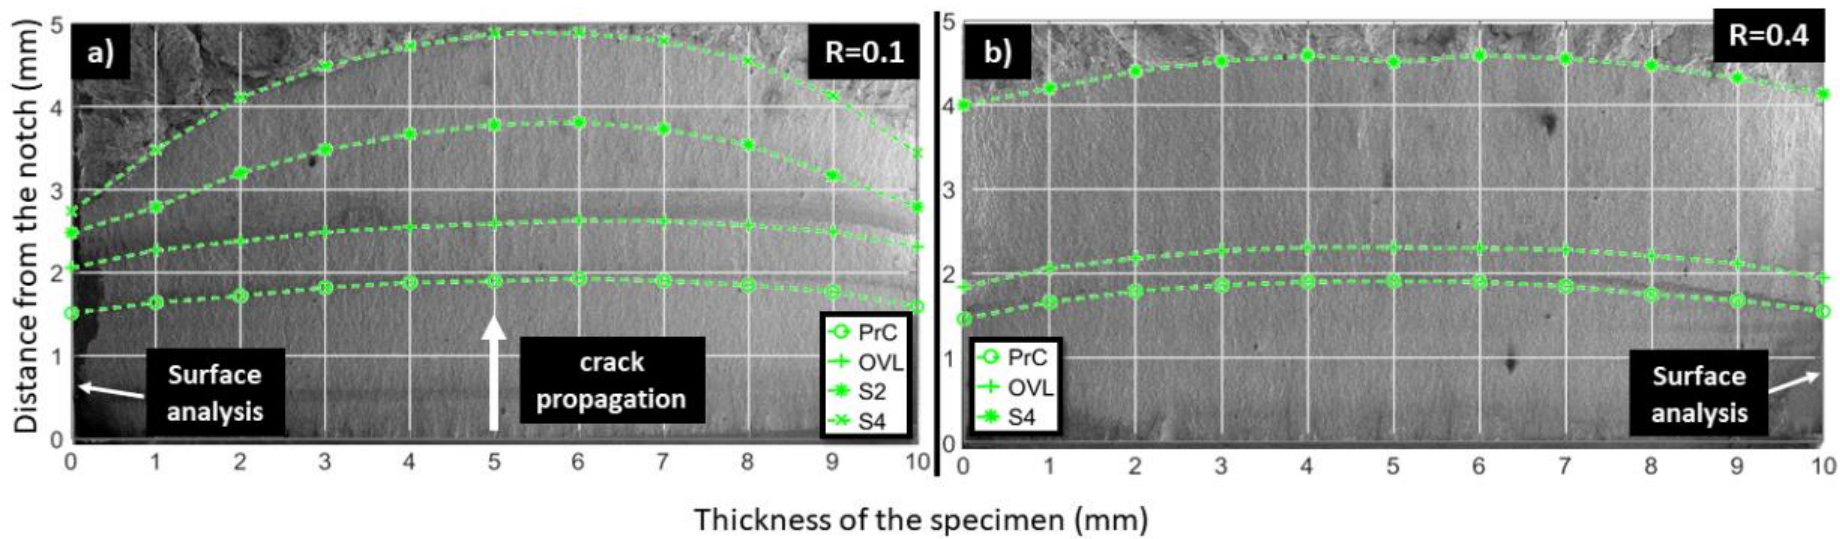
Fractography of the fracture surface a) at  $R=0.1$  b) at  $R=0.4$
